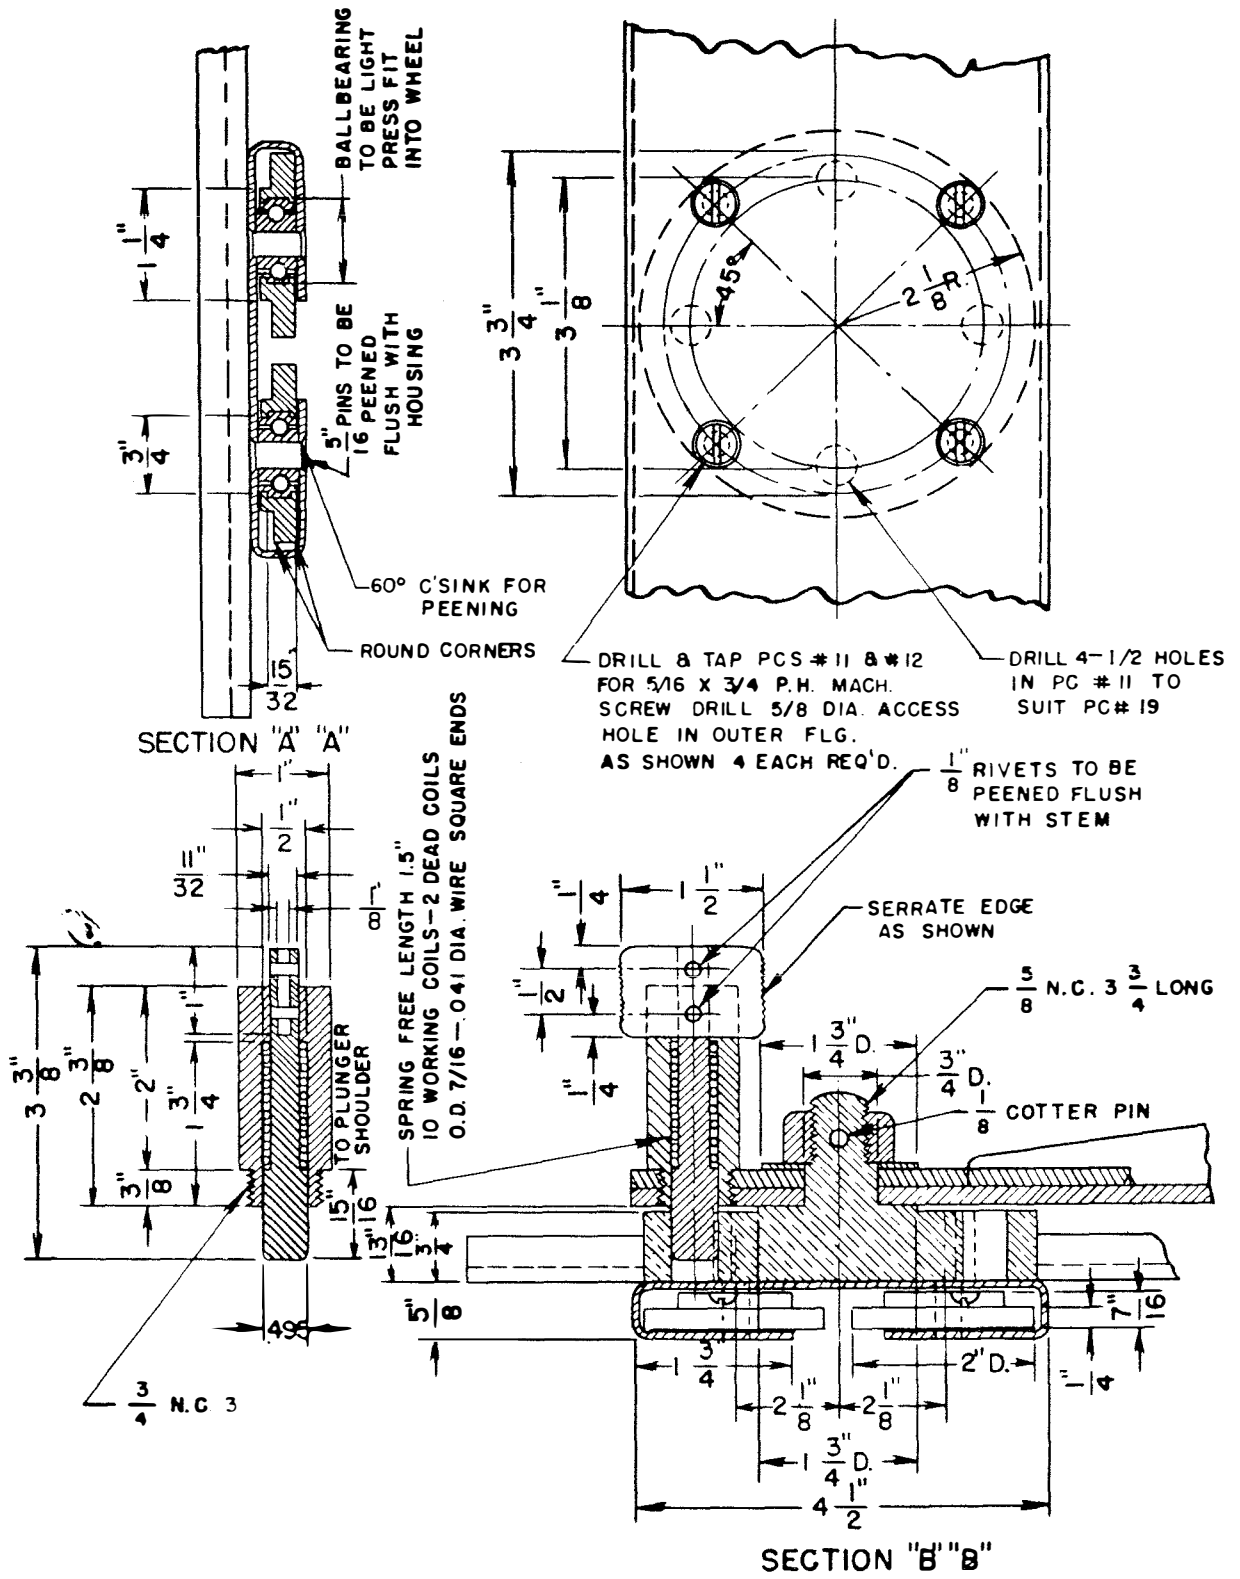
Construction Details For TDZ Test Rack (Cont.)
